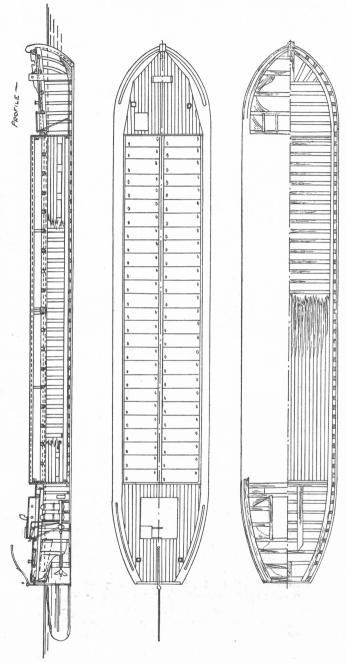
CONSTRUCTION PLAN MOTOR CANAL BARGE. Type 3.
